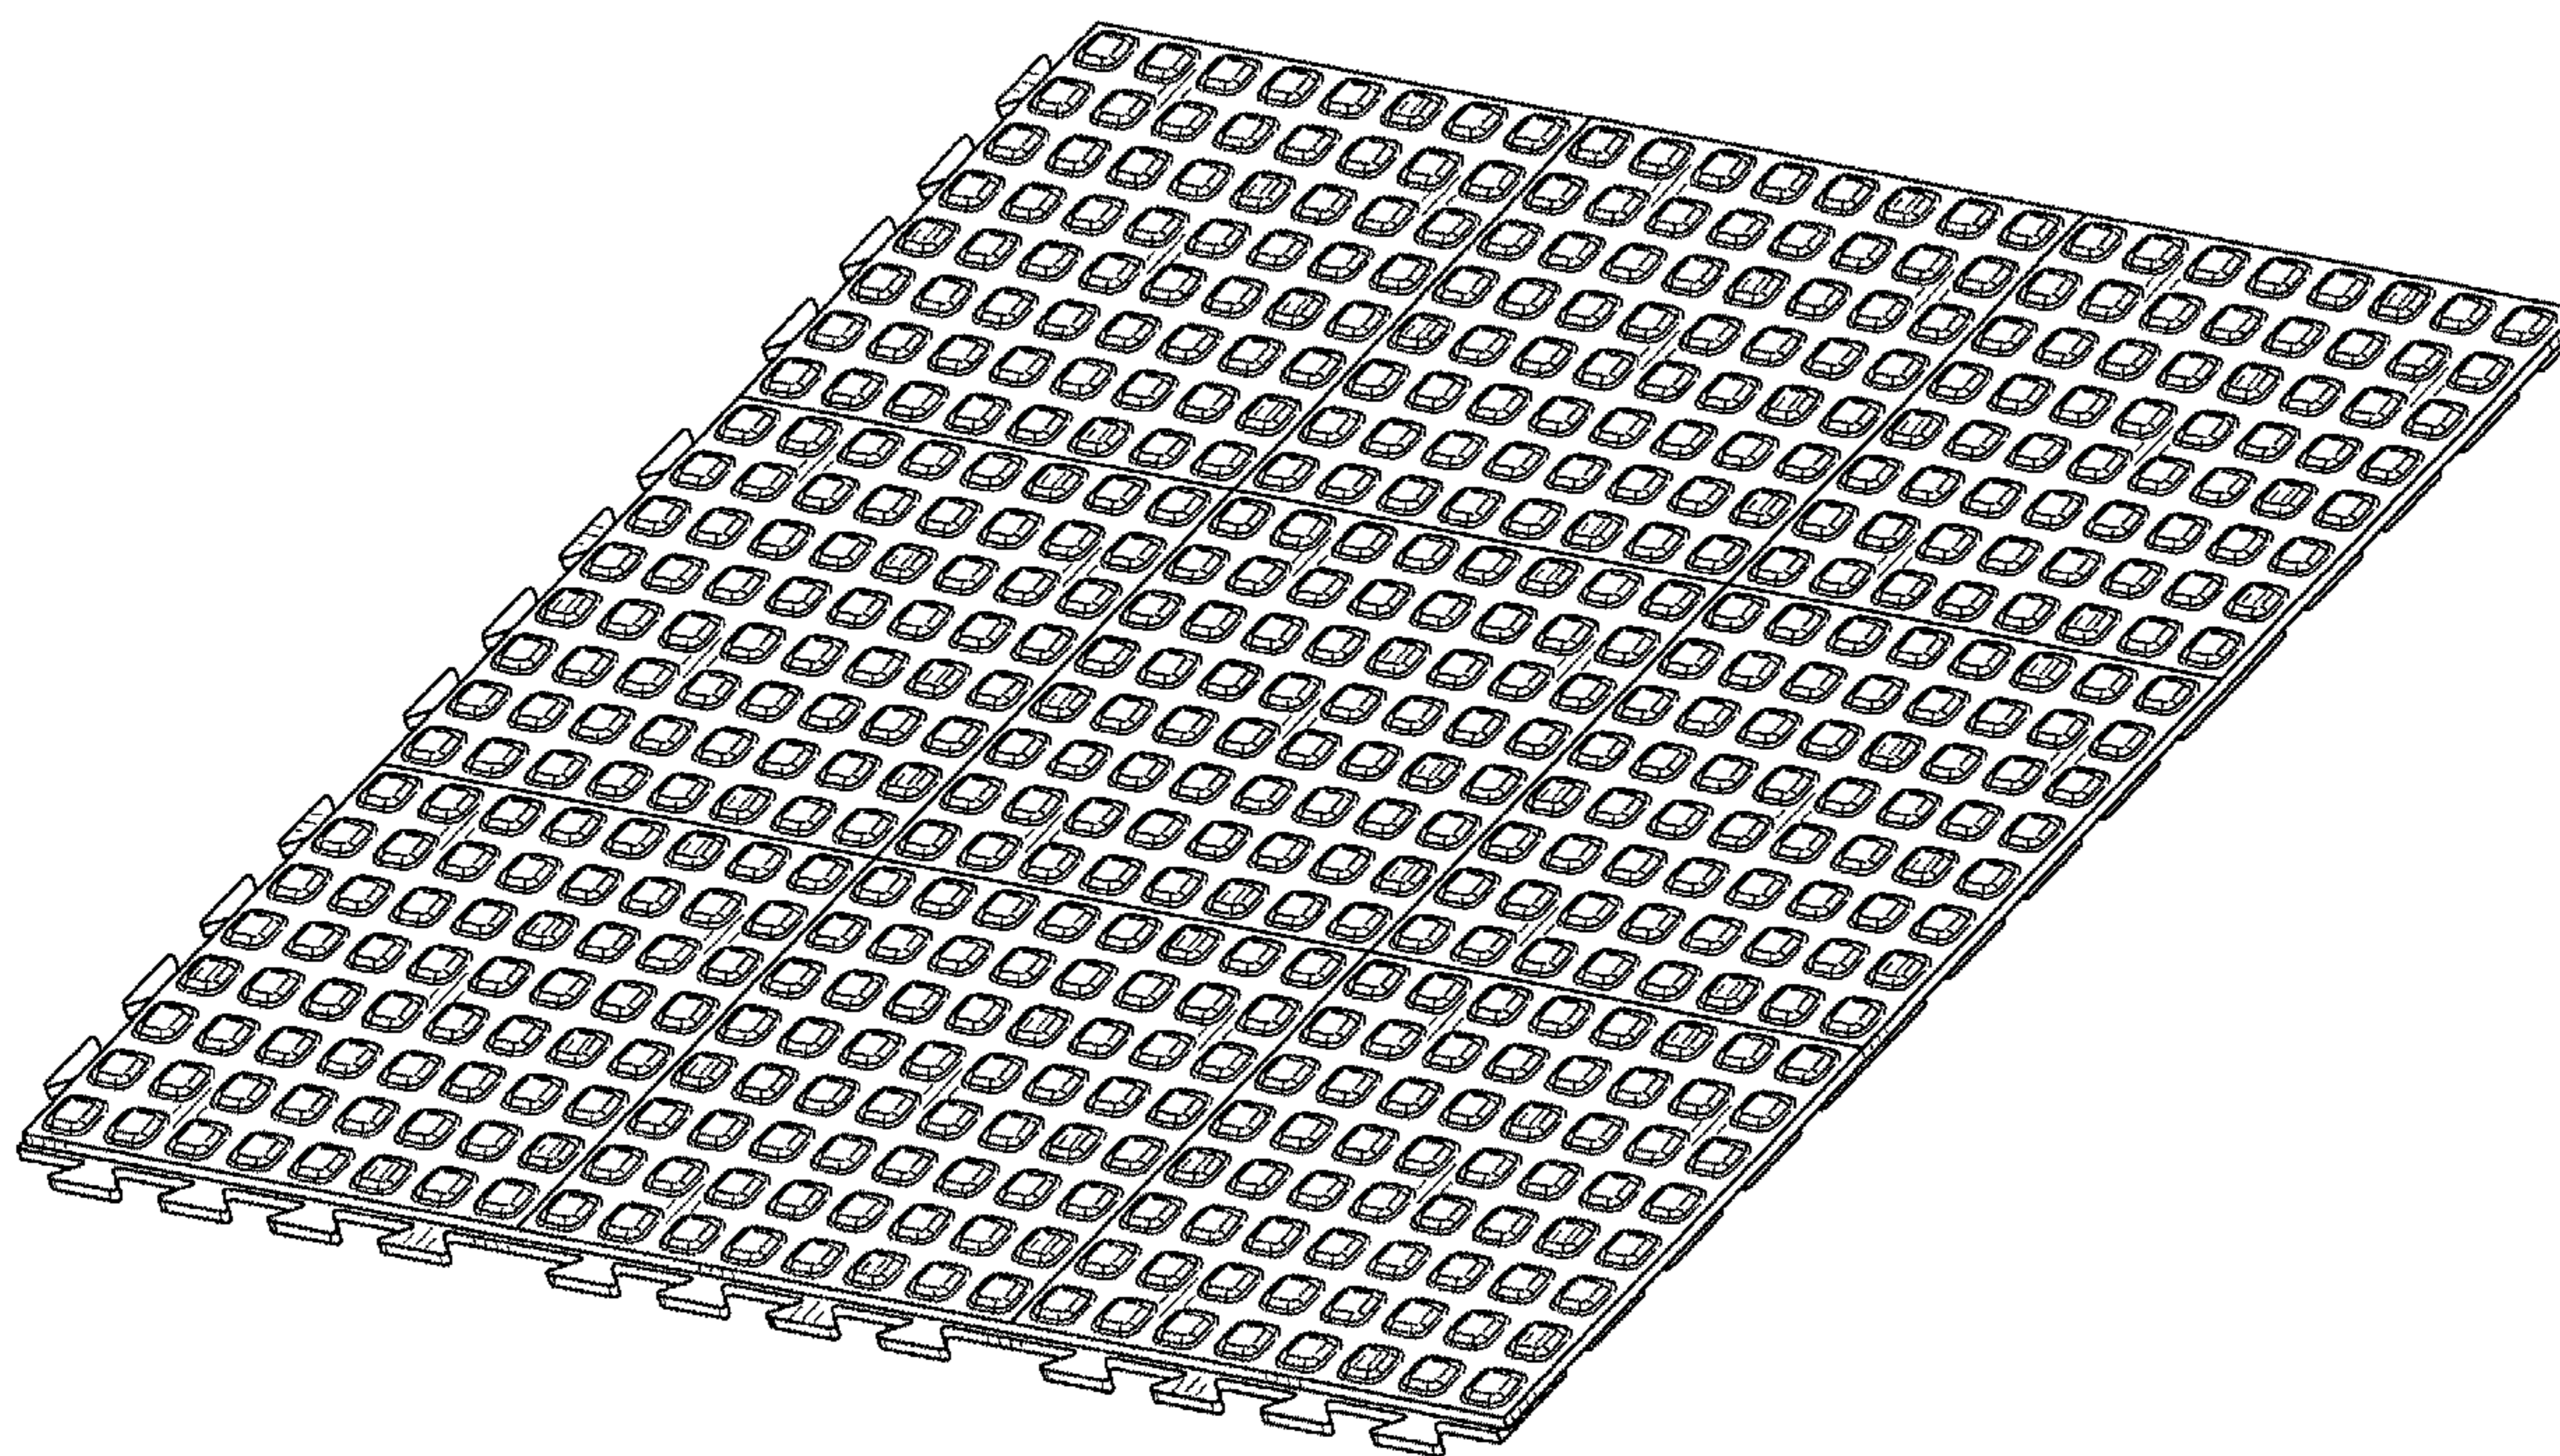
is a front side perspective view of a first embodiment of a molded mat, showing my new design;
